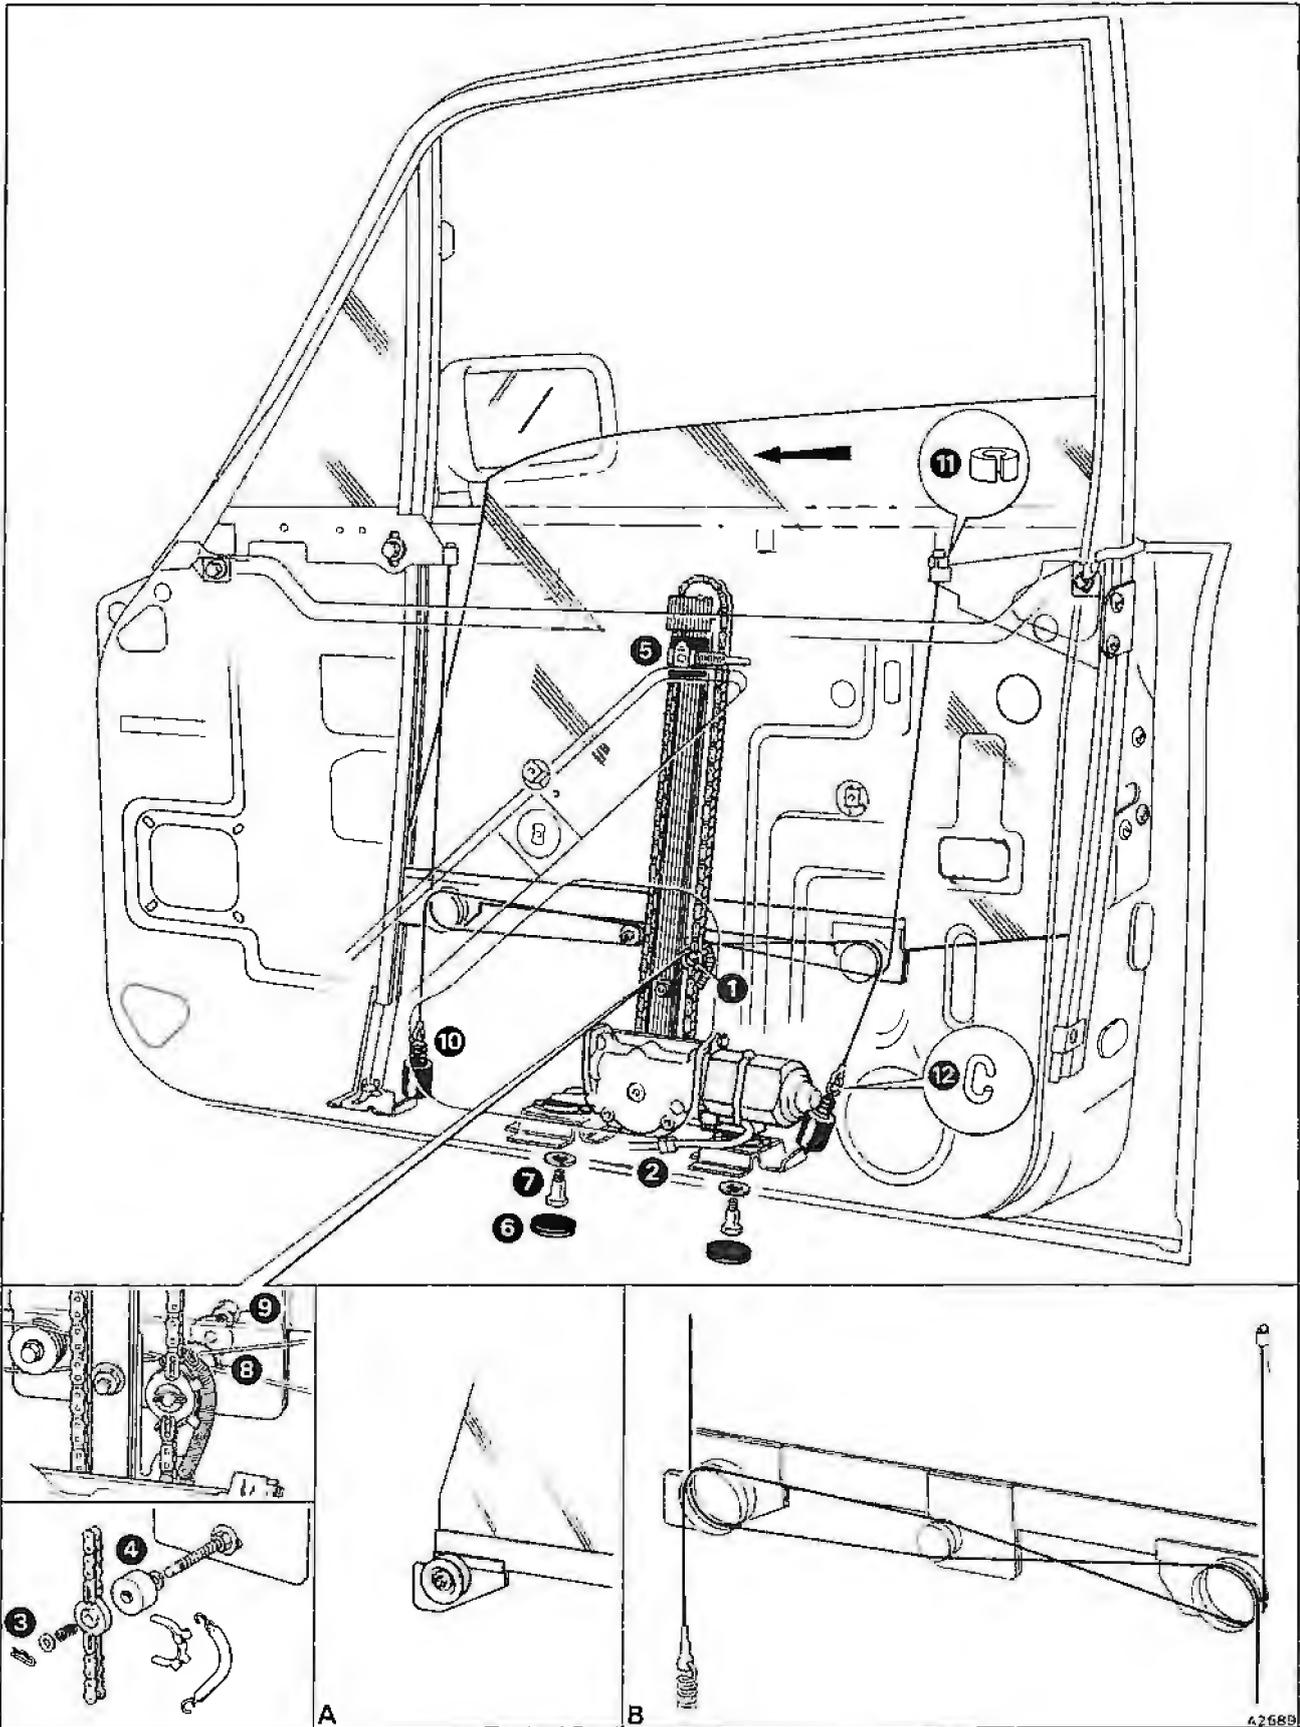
Window lift mechanism, door glass, and wire guidance assembly and fittings
